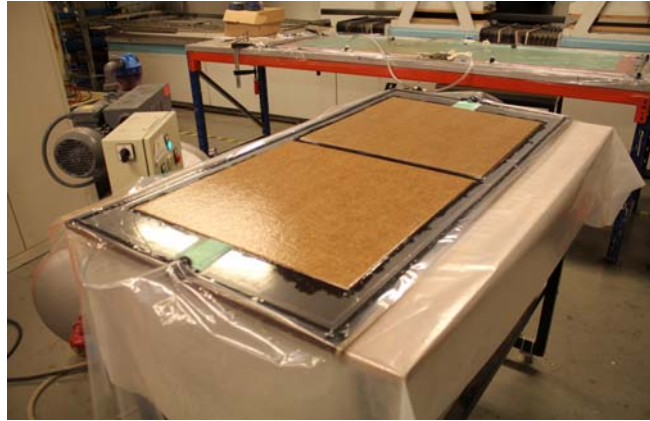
Sandwich samples manufacturing: manual molding and vacuum pressing.
